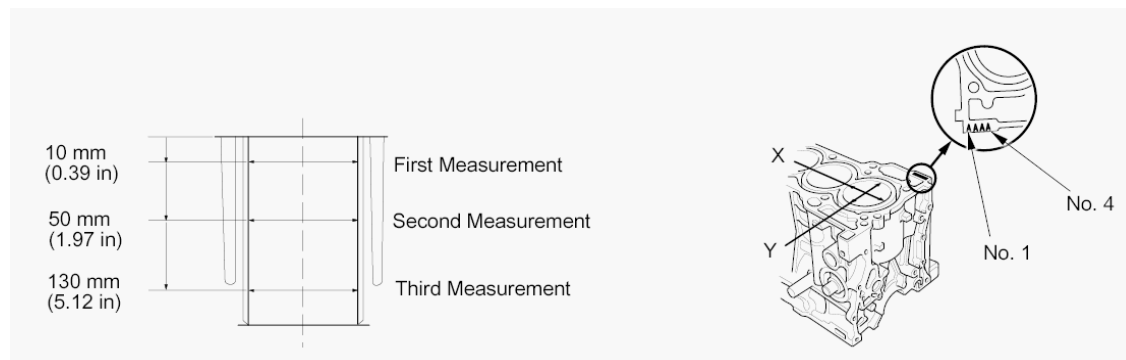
Measuring Wear & Taper In Direction X & Y In Cylinder
